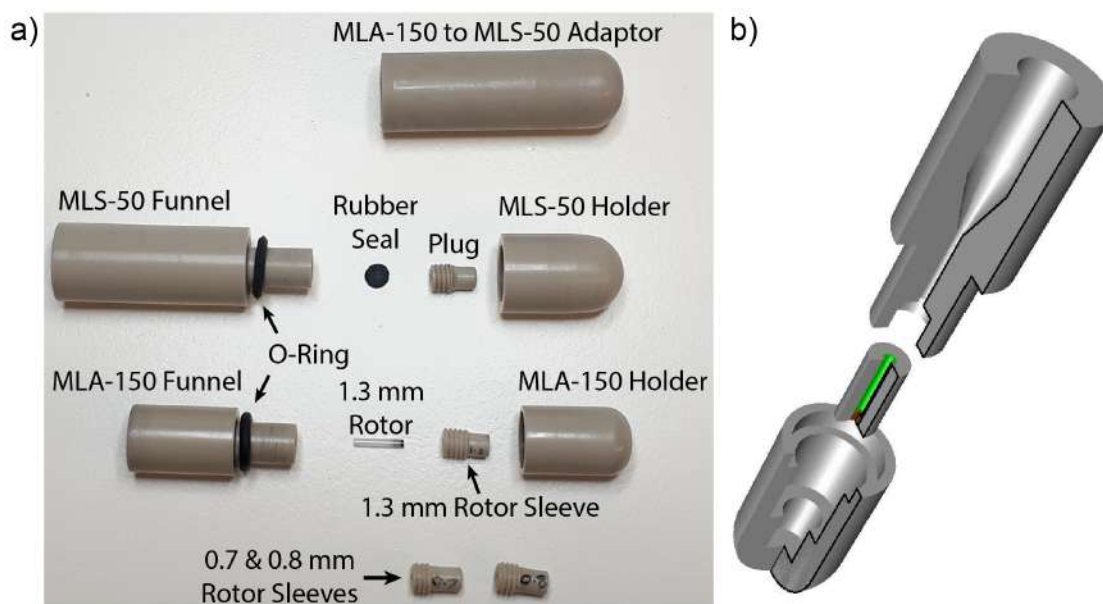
a) The tools needed for sedimenting and packing protein into 0.7 mm, 0.8 mm and 1.3 mm SSNMR rotors. The MLS-50 tool fits into both a fixed angle and a swinging bucket rotor. The adaptor holds the MLA-150 assembly so that it fits into the MLS-50 swinging bucket centrifuge rotor. The plugs and rotor sleeves are interchangeable between the two tools. b) A 3D-cutout view to show the internal funnel, sample reservoir, rotor sleeve, and seatings of the device (O-ring not included). The rotor is highlighted in green.
